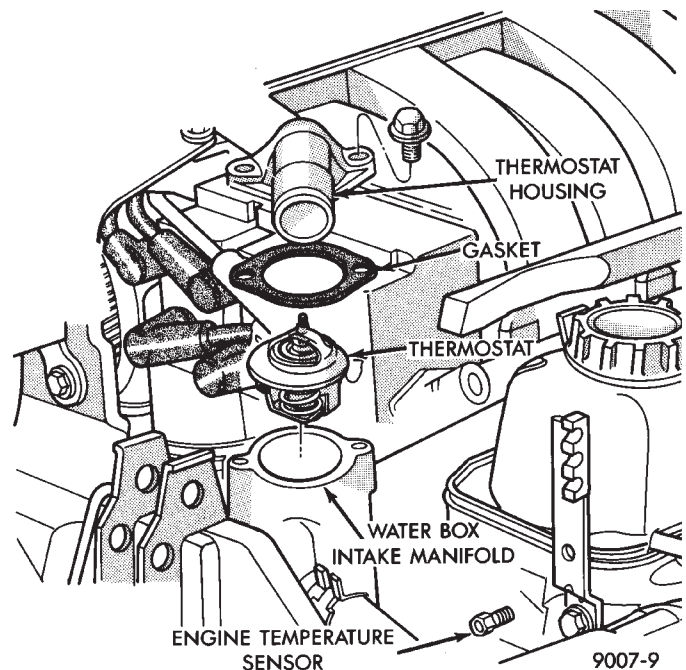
Thermostat, Housing, and Water Box—3.3/3.8L Engines
